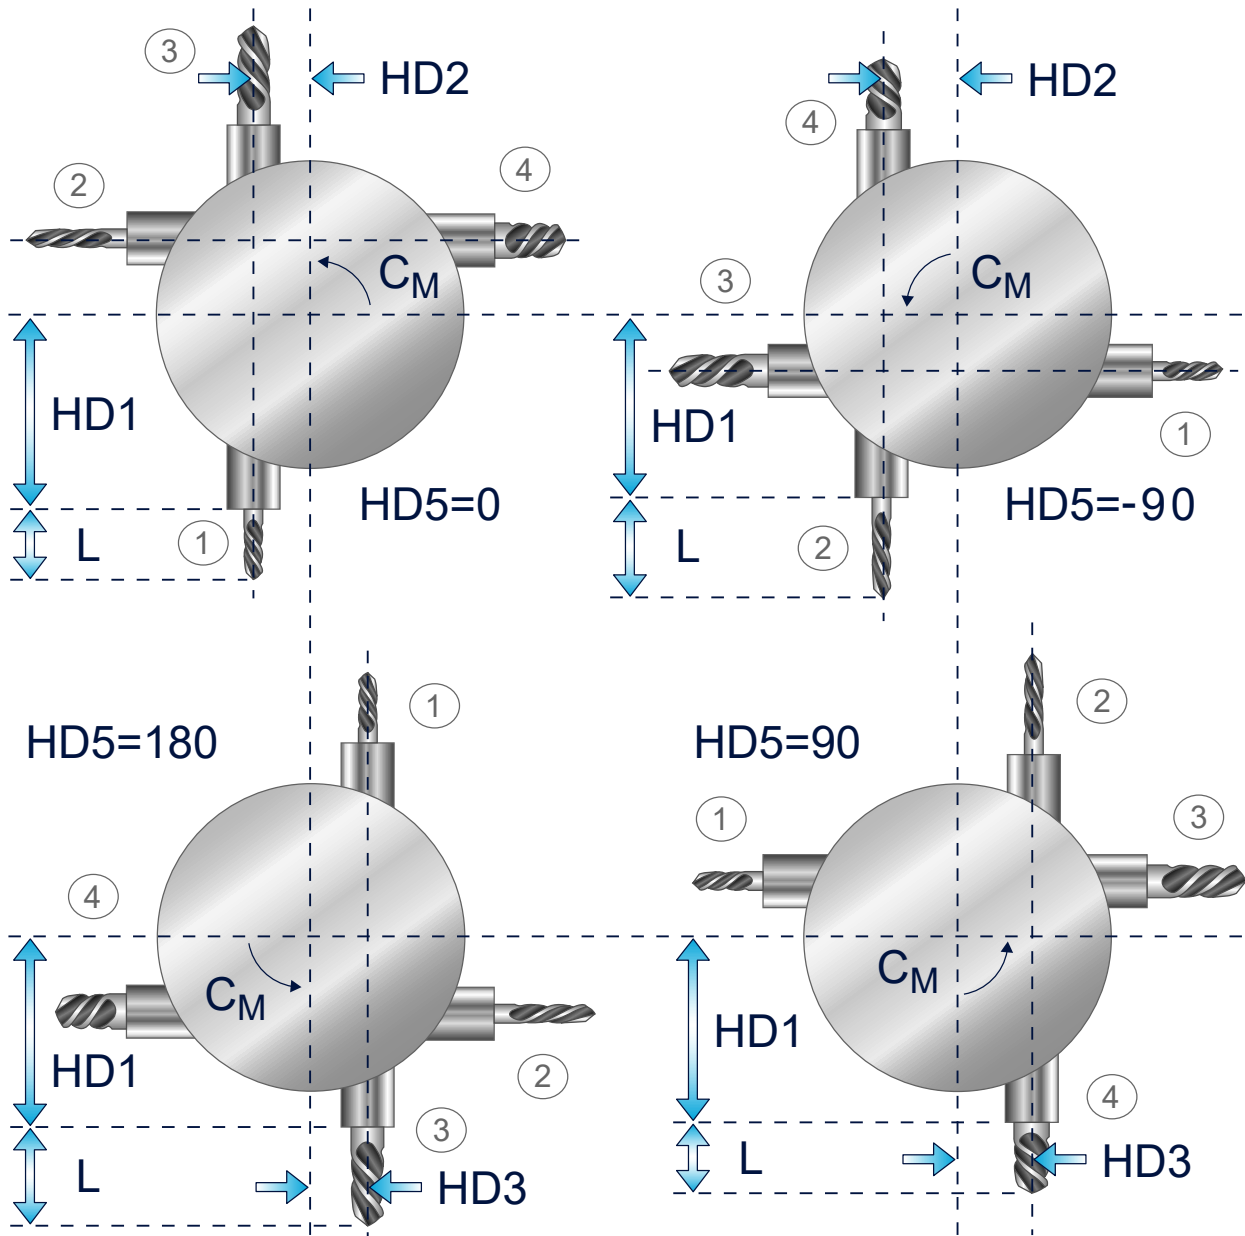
Tool crosshead with zero positions of the tools 1 to 4
